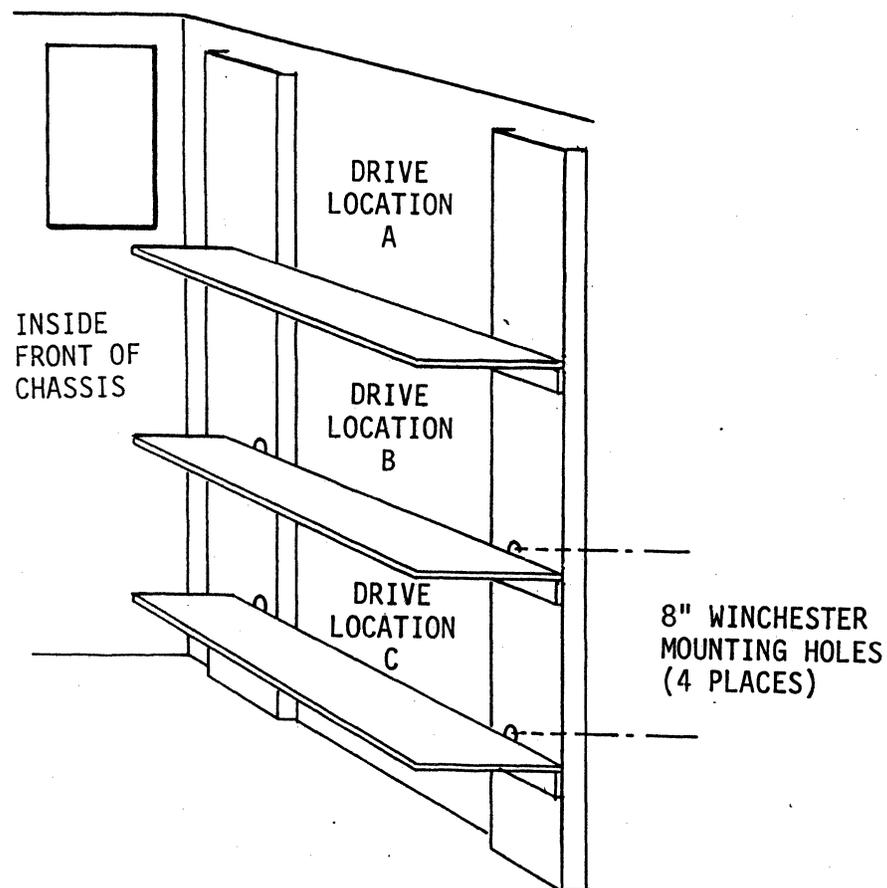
STORAGE DEVICE MOUNTING LOCATIONS
